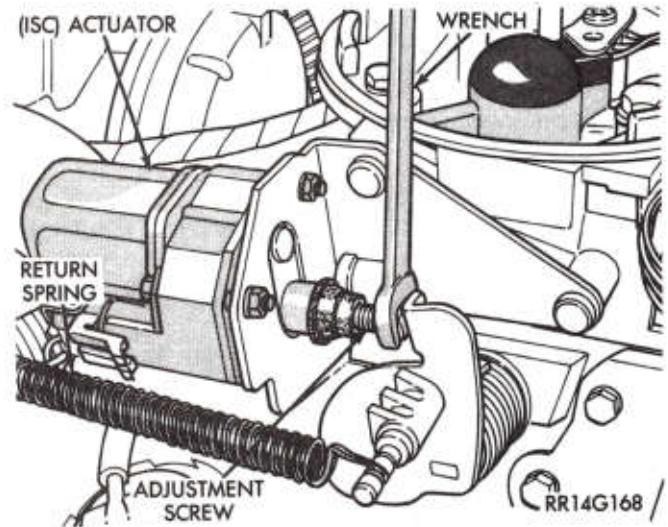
Adjusting the Idle Speed Control (ISC) Actuator
